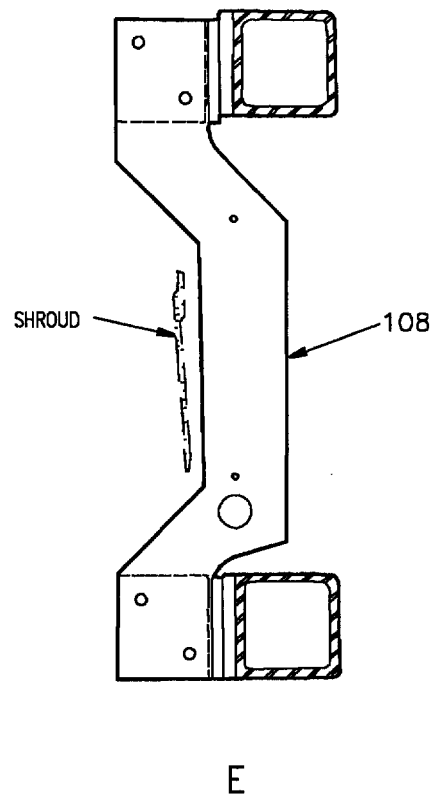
Moldline Contour and Inboard Trim Inspection (Sheet 4)
